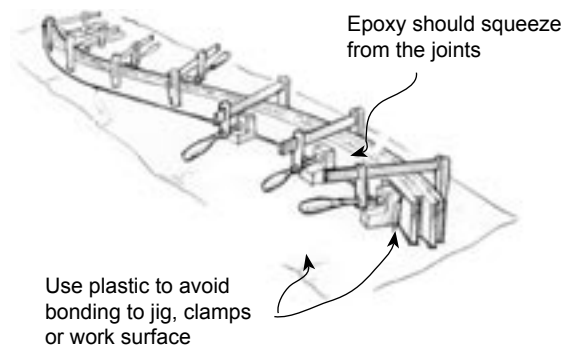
Clamp the appropriate number of coated strips into the jig. Trim the stringer to size after the epoxy is fully cured.
